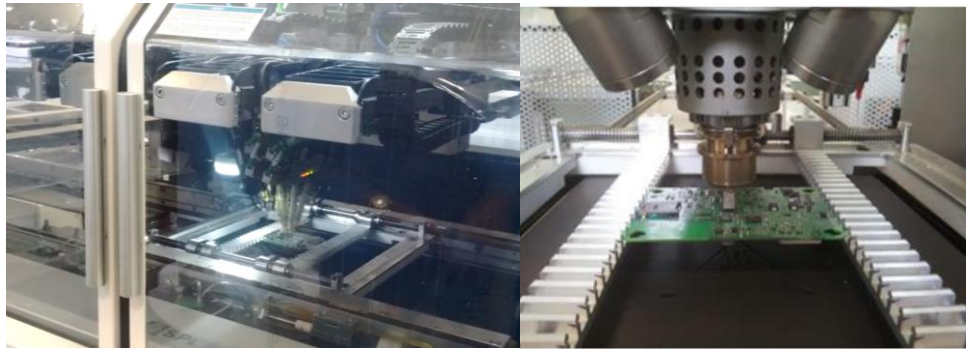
Pictures illustrating the two sections of Cell 2 for the testing (left), and automatic disassembly and replacement (right) of components in PCBs at ITIA-CNR (Colledani, Copani et al. 2014).
